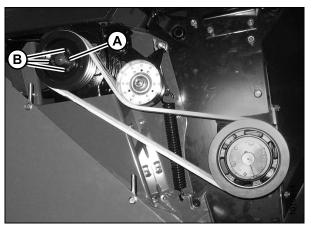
Drive Belt and Pulleys on Left Side of Conditioner
